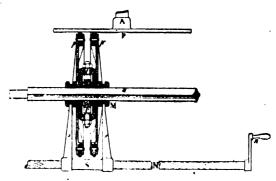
PART-SECTIONAL VIEW OF FRICTION-DRIVING GEAR.
